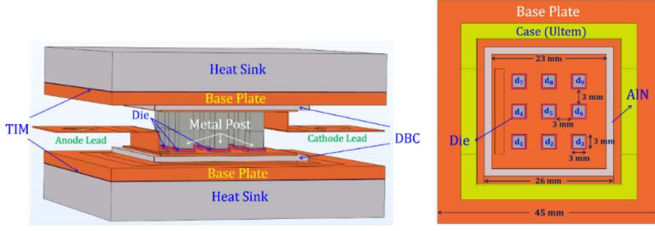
3D schematic view of the 10-kV power module with its dimensions.
